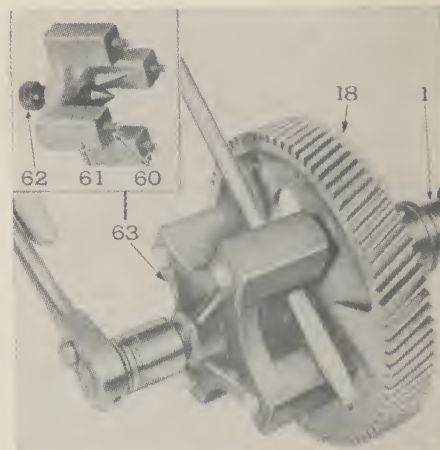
A—A GM engine showing method used in removing either the camshaft gear or balance shaft gear.
